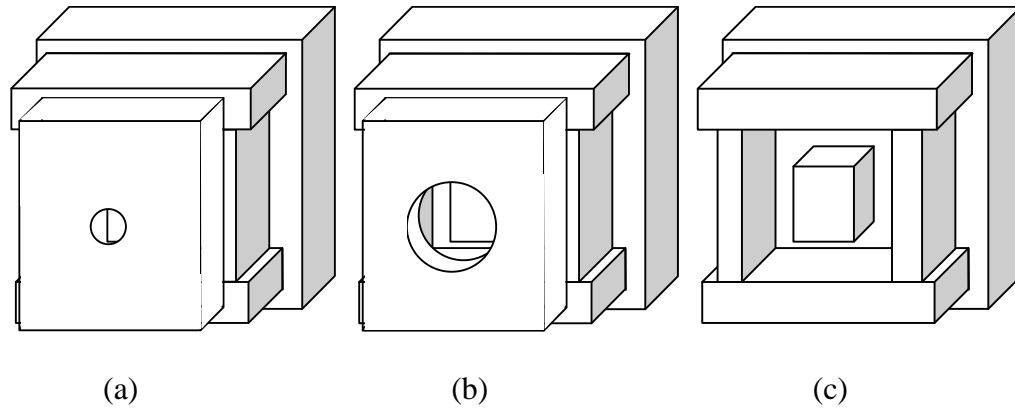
Assembly where one part has a hole in it. (a) Original assembly (b) Assembly with hole enlarged. (c) Assembly without the part with the hole.
